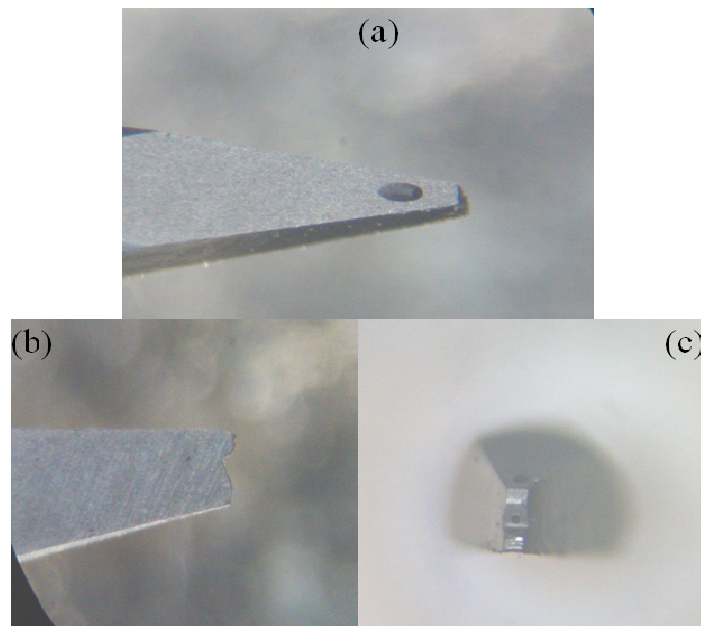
A microscopic view of the wedge used for the bonding. (a) Wedge tip, (b) Side view Wedge tip, (c) Front view Wedge tip
